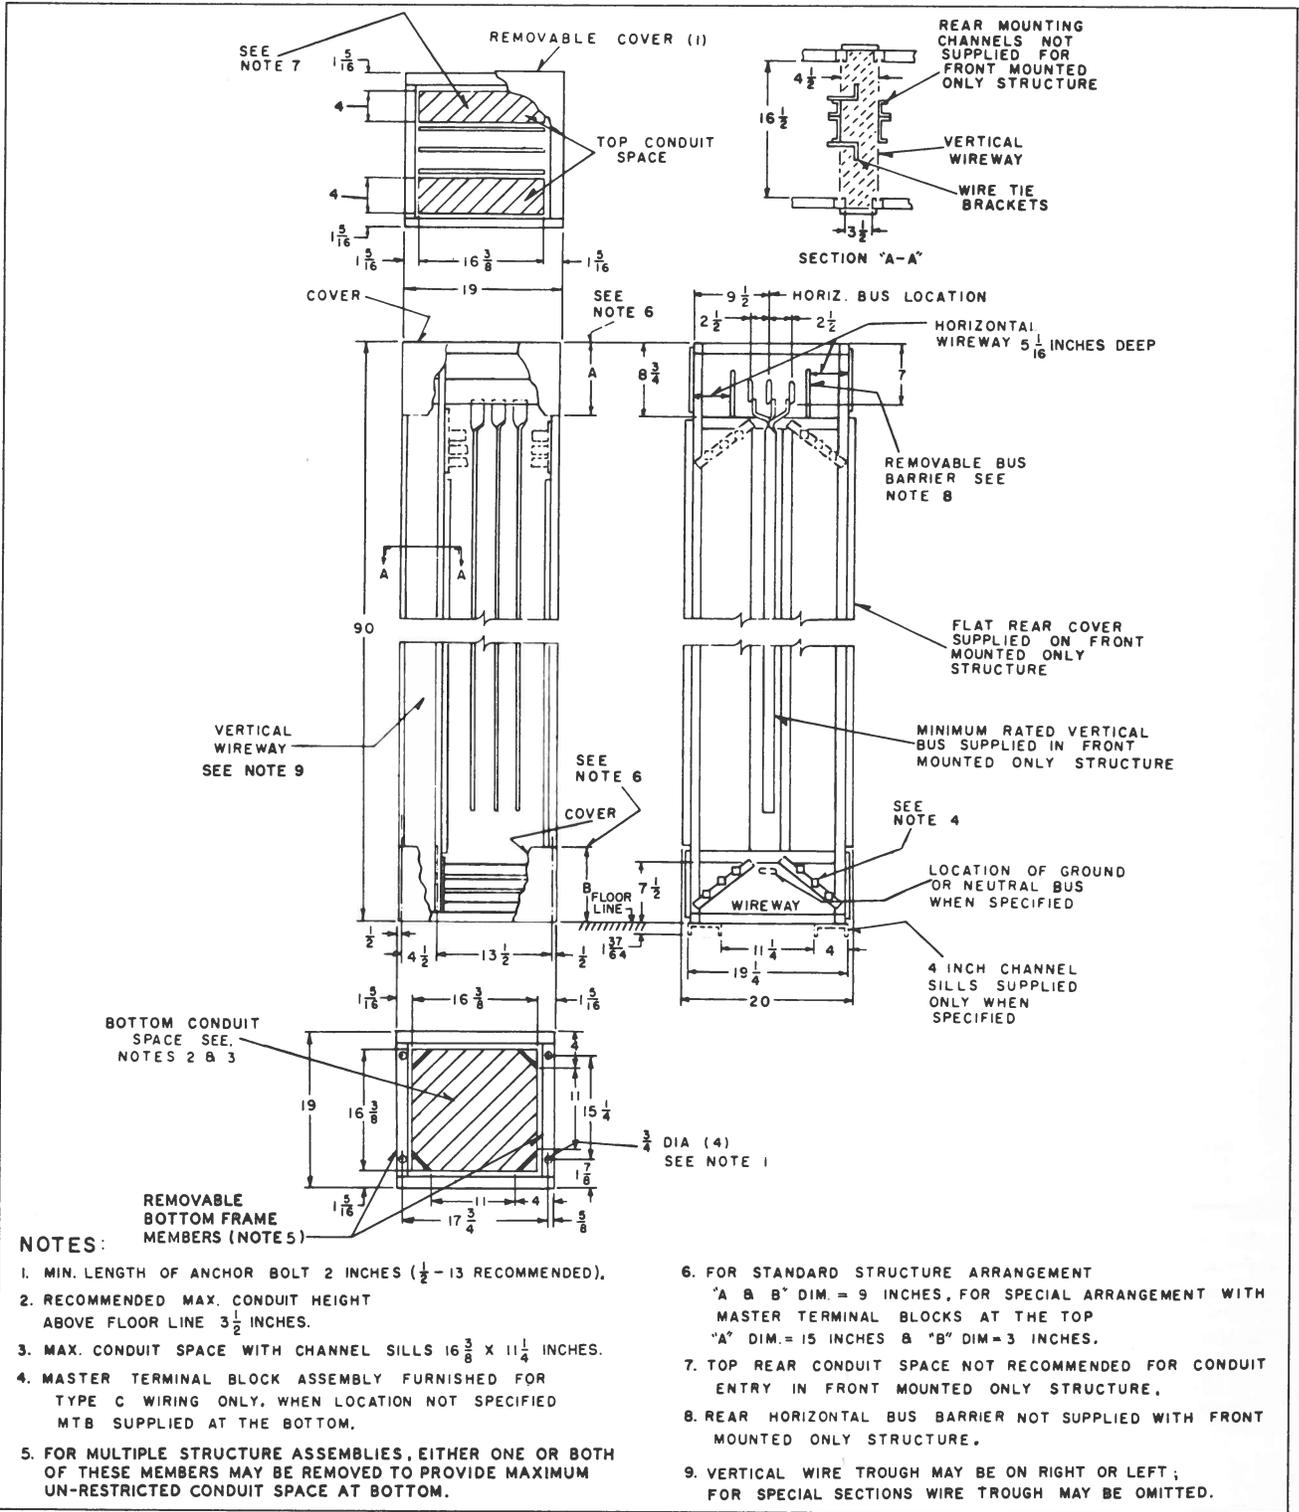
Outline & Floor Plan - 20 Inch Deep One Compartment - One Wireway
